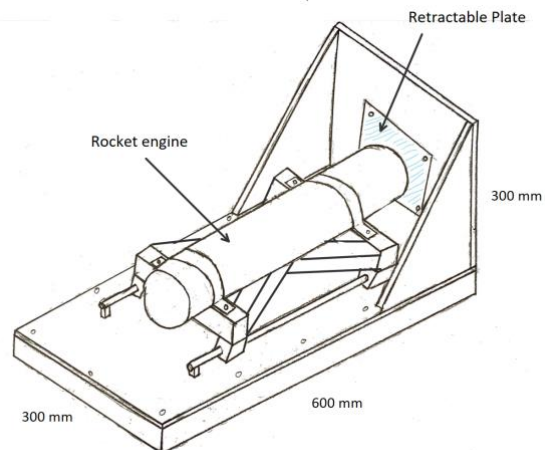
Isometric view of the second horizontal design; held down by saddle clamps, the motor will fire into a reinforced plate.
